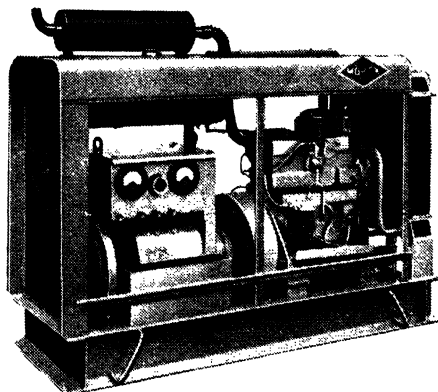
300/400 Ampere Diesel Engine Driven Equipment.
